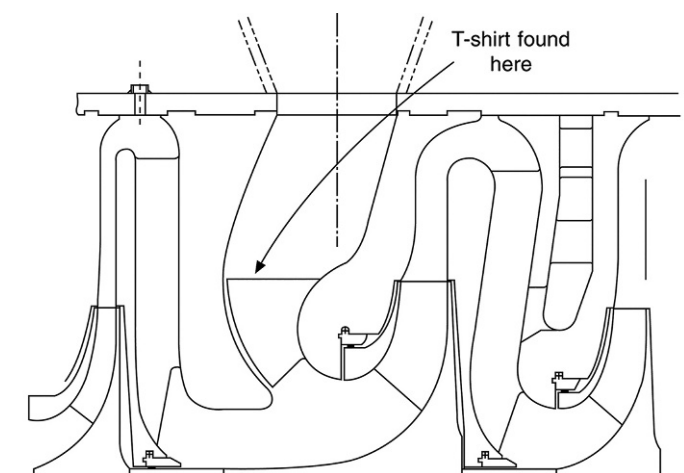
Case study E—inlet blockage. *Problem:* A multisection multistage centrifugal compressor had low head on one section. *Discussion:* Since the unit had just been rerated, a design or manufacturing problem was suspected. The compressor was disassembled and inspected. *Resolution:* A worker's T-shirt had been found partially blocking the inlet guide vanes on the section, which was low in head.
